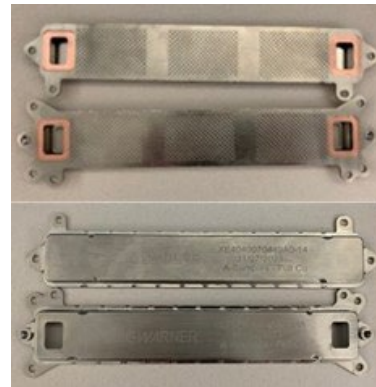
Lower and Upper Cu Heatsink Prototype
